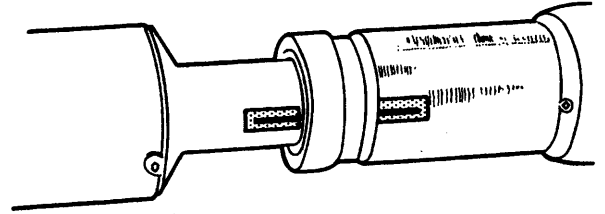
Drive-Shaft Arrows Lined Up "In Phase" W4000020
